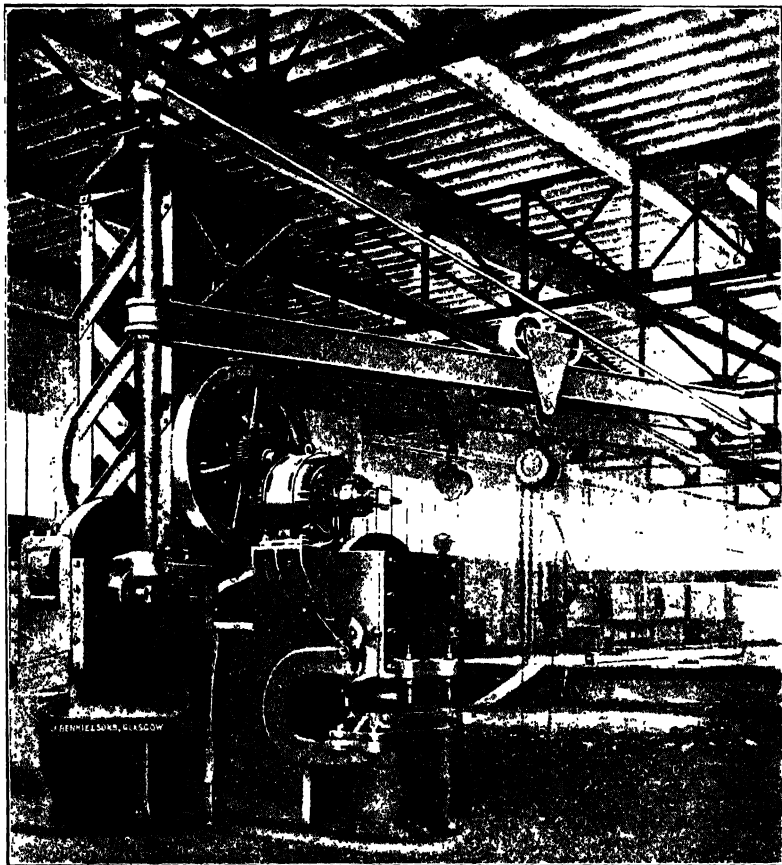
DOUBLE PUNCHING MACHINE WITH SIDE SHEARS
